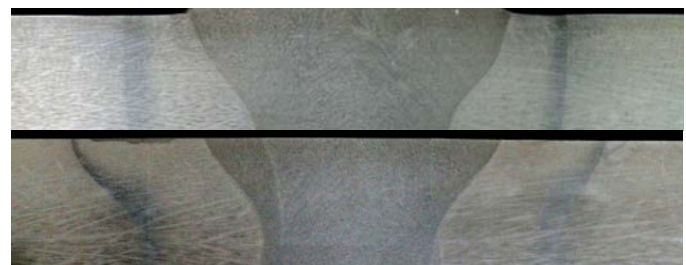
Thermite Weld Longitudinal Cross-Section View of Railhead. Top – Untreated Thermite Weld; Bottom – Overlay Treated Thermite Weld
